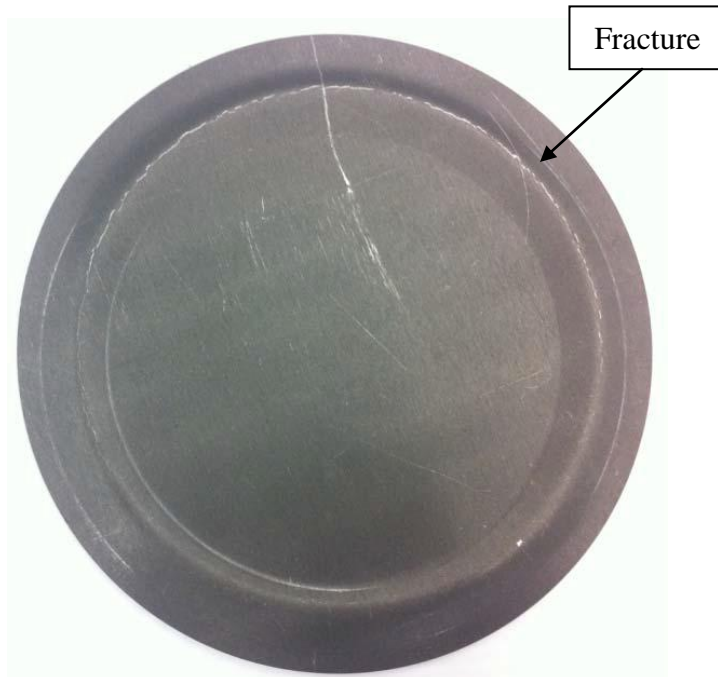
Fracture of fully annealed AZ31 specimen in the lock bead region prior to punch stretching. The specimen was clamped using the original lock-bead design using an existing LDH tooling in the laboratory.
